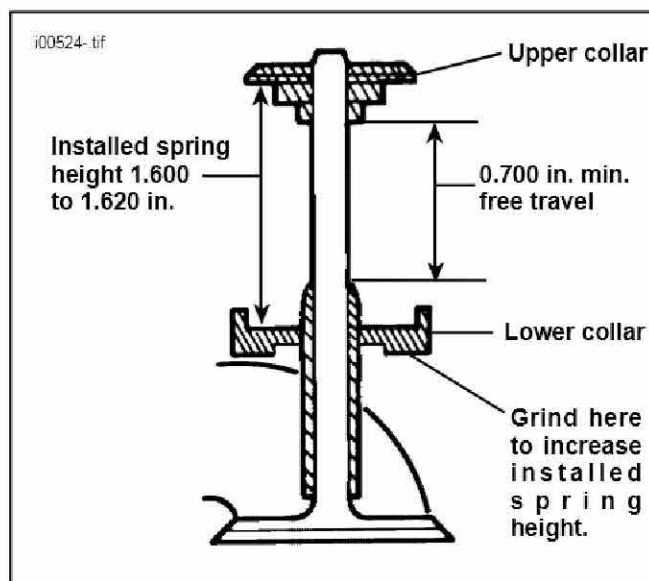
Valve Free Travel Check and Installed Valve Spring Height
